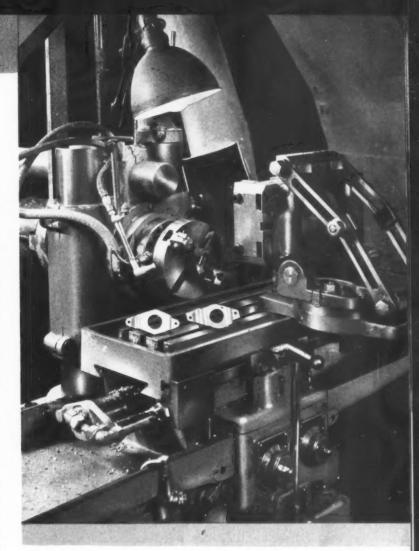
Milling Two Woodruff Keyways in Flapcontrol Gear-shafts in an Operation that is Completely Automatic
